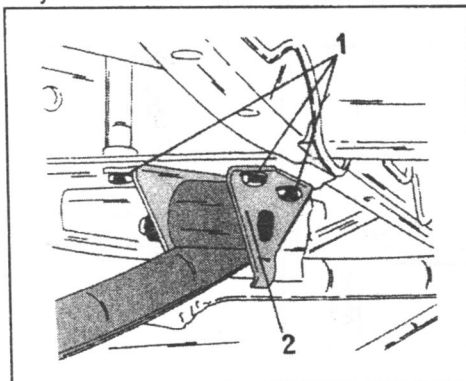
The bolts (1) secure the front spring mounting bracket (2) to the chassis.
